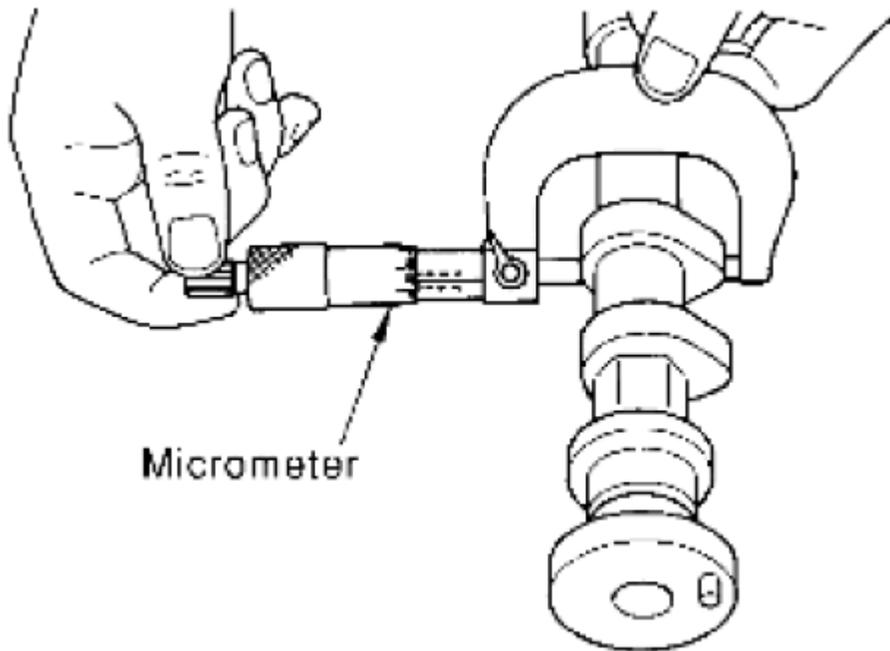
Measuring Camshaft Cam Height Using Micrometer
